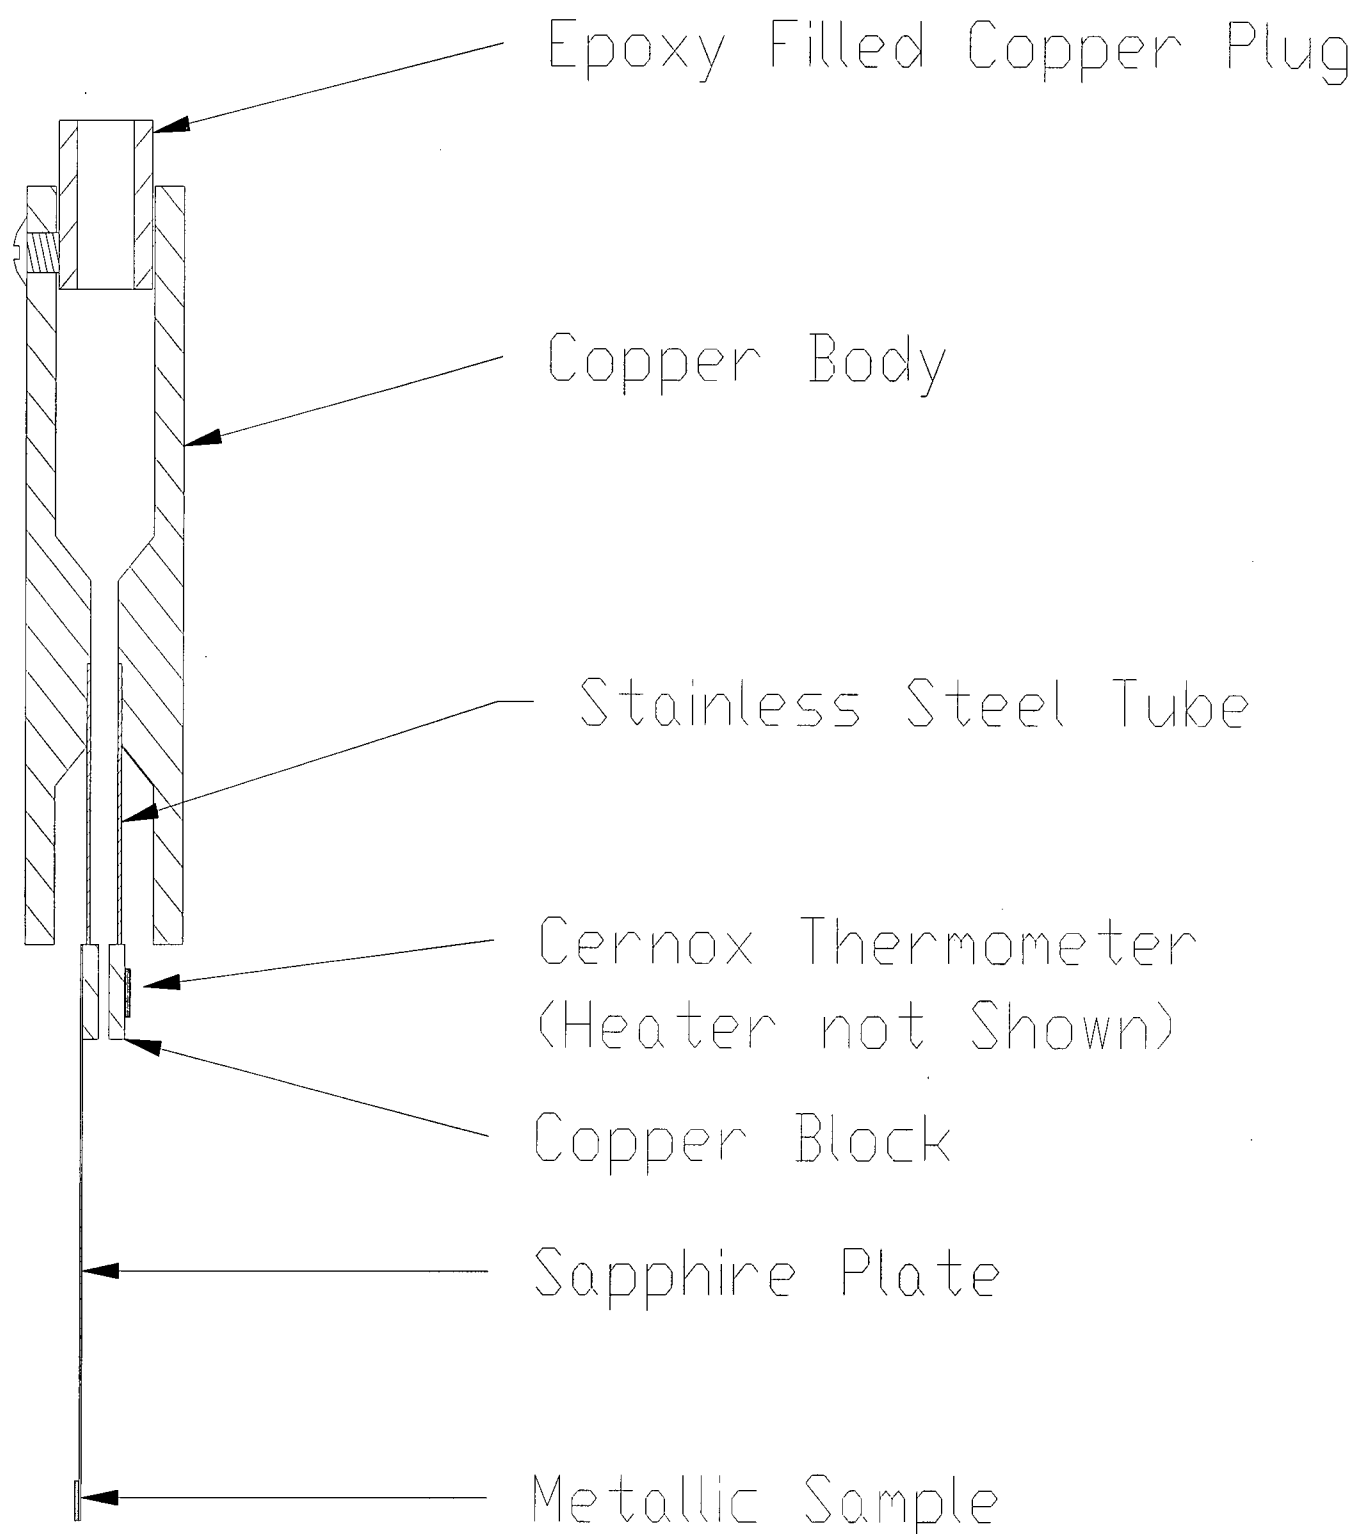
Details of the stainless steel and copper power meter. The stainless steel tube has dimensions  $\ell = 3.5\text{mm}$ ,  $O.D. = 1.6\text{mm}$ ,  $t = 0.3\text{mm}$ .
